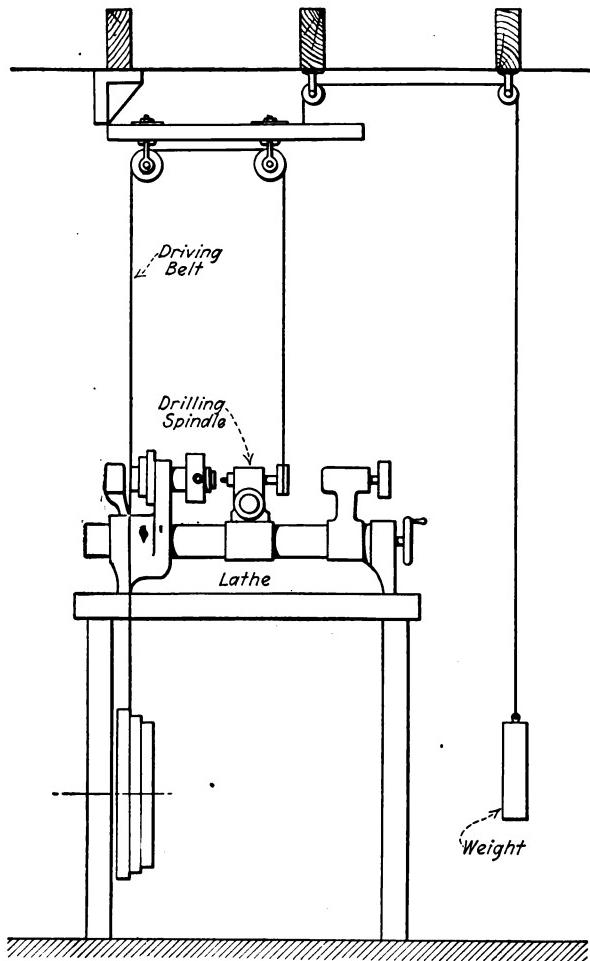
The arrangement of an over-head attachment for a bench lathe
